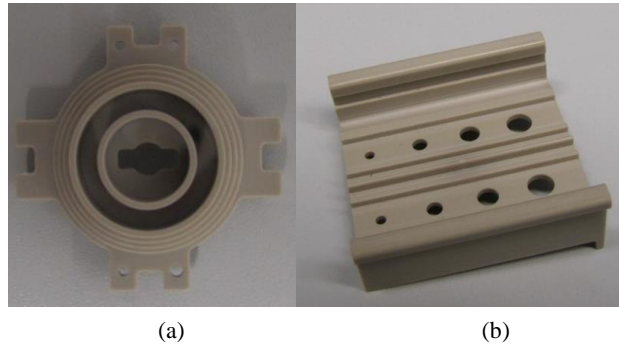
(a) Stepped cap, and (b) ED housing. The pictures show the two selected workpieces made of PEEK.
